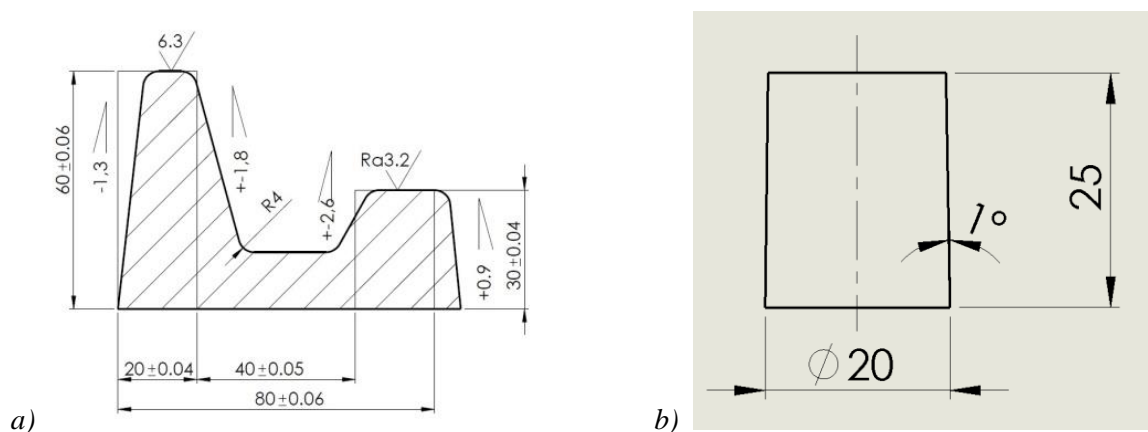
Testes samples: a) example of typical casting model; b) tested samples.
